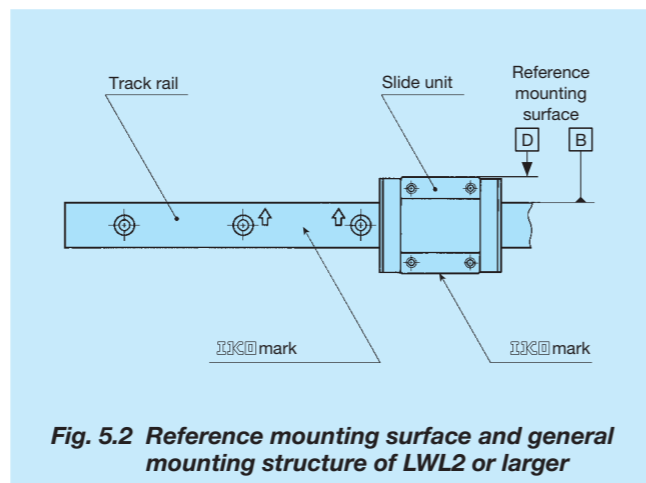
Reference mounting surface and general mounting structure of LWL2 or larger
